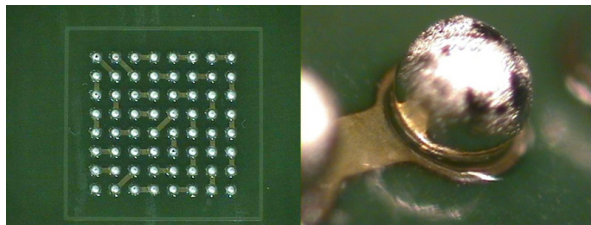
SAC305 solder ball on ENEPIG surface finish
